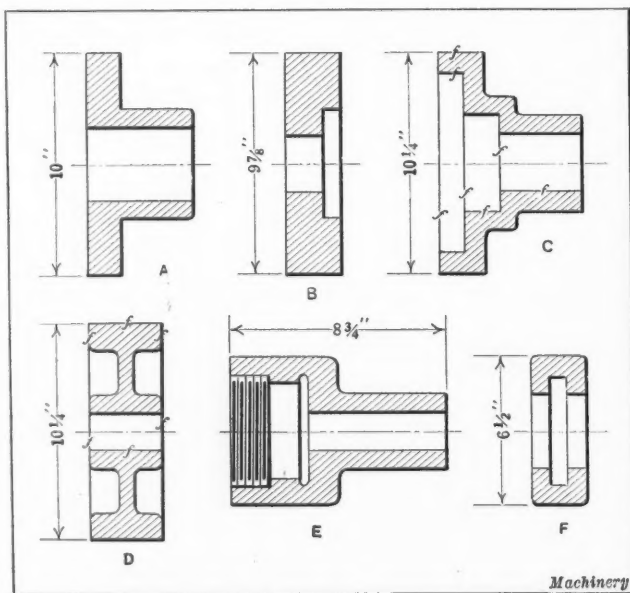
Examples of Castings and Forgings that can be machined profitably in Small Lots on the Turret Lathe
